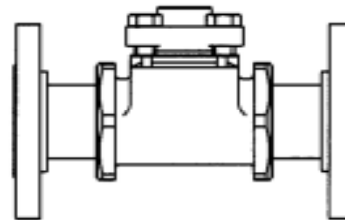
Flanged Valve Body Assembly with Standard Bonnet, 24000SF, Sizes 1/2", 3/4", 1" and 1-1/2"
